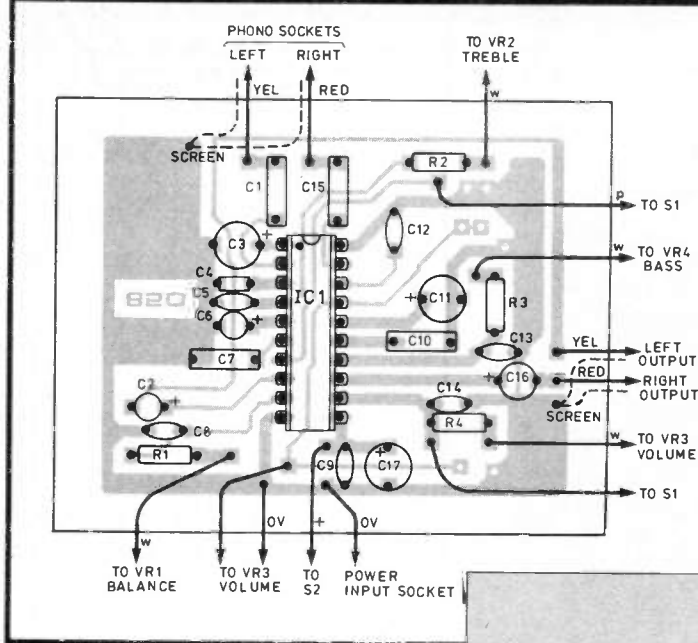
Printed circuit board component layout and under-side copper foil master pattern for the Tone Control only board. This board is used with the 10+10W Amplifier (next month).
